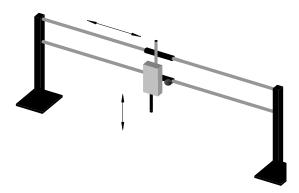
Design Concept for Two-Axis Drill Fixture.
